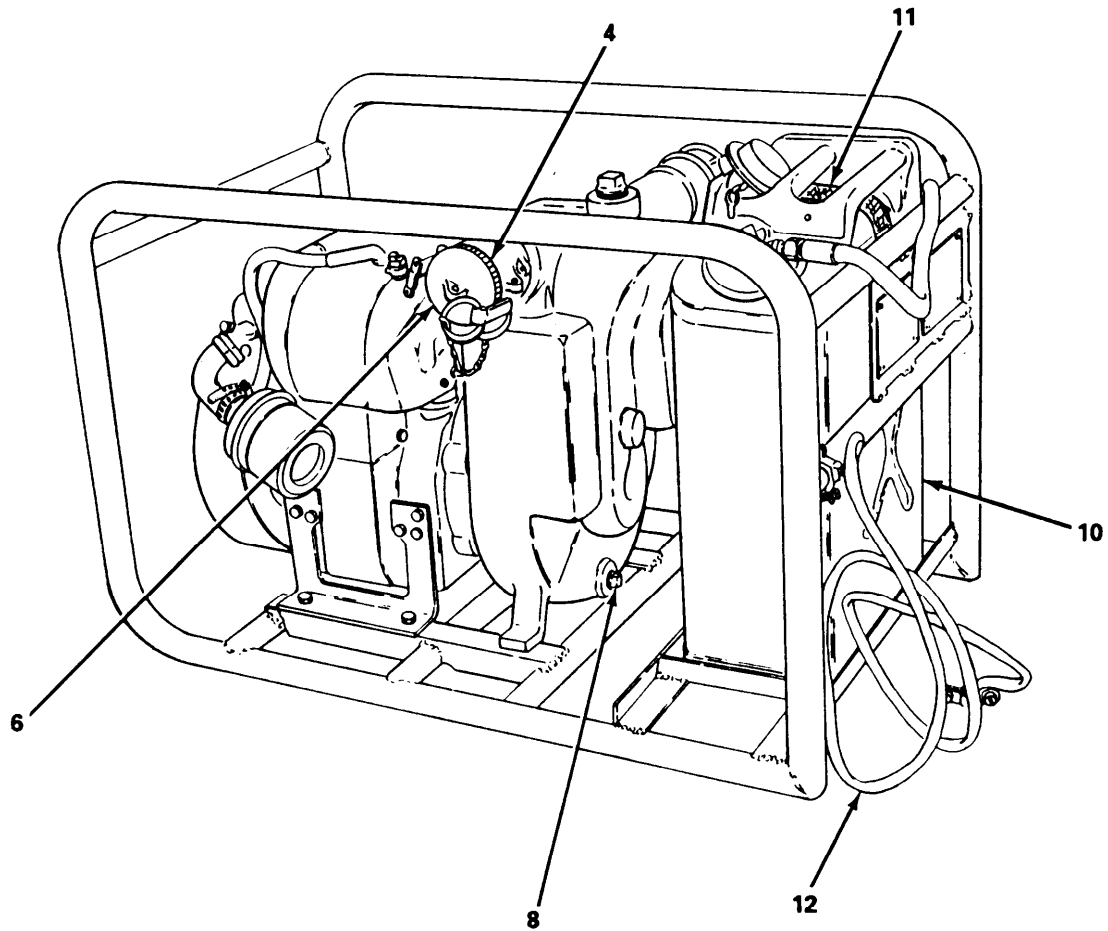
Pump/Engine Assembly (Sheet 2 of 2).
